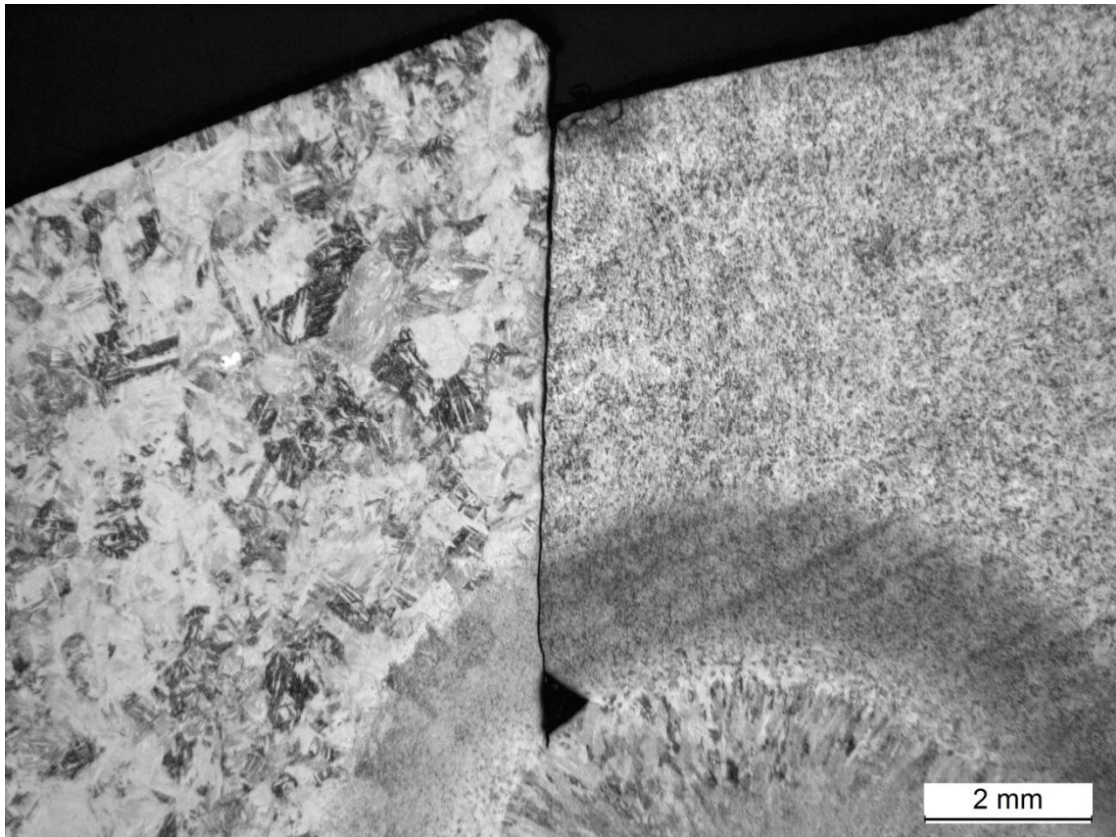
A crack initiated from a machined geometrical notch at the inner surface of the sample. A lack-of-fusion weld defect (triangle shaped) in the weld root area.
